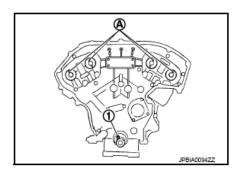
Identifying Camshaft Dowel Pin And Crankshaft Key Courtesy of NISSAN NORTH AMERICA, INC.
